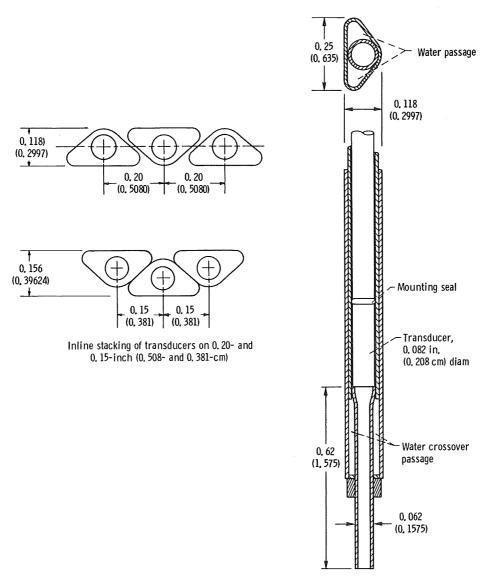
0. 082-Inch- (0. 208-cm-) diameter transducer and cooling jacket with stacking detail. Dimensions are in inches (cm).
